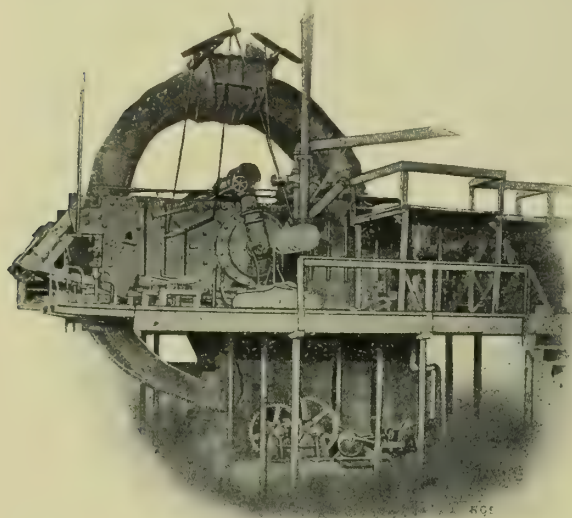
MECHANICAL PUDDLING MACHINE.
